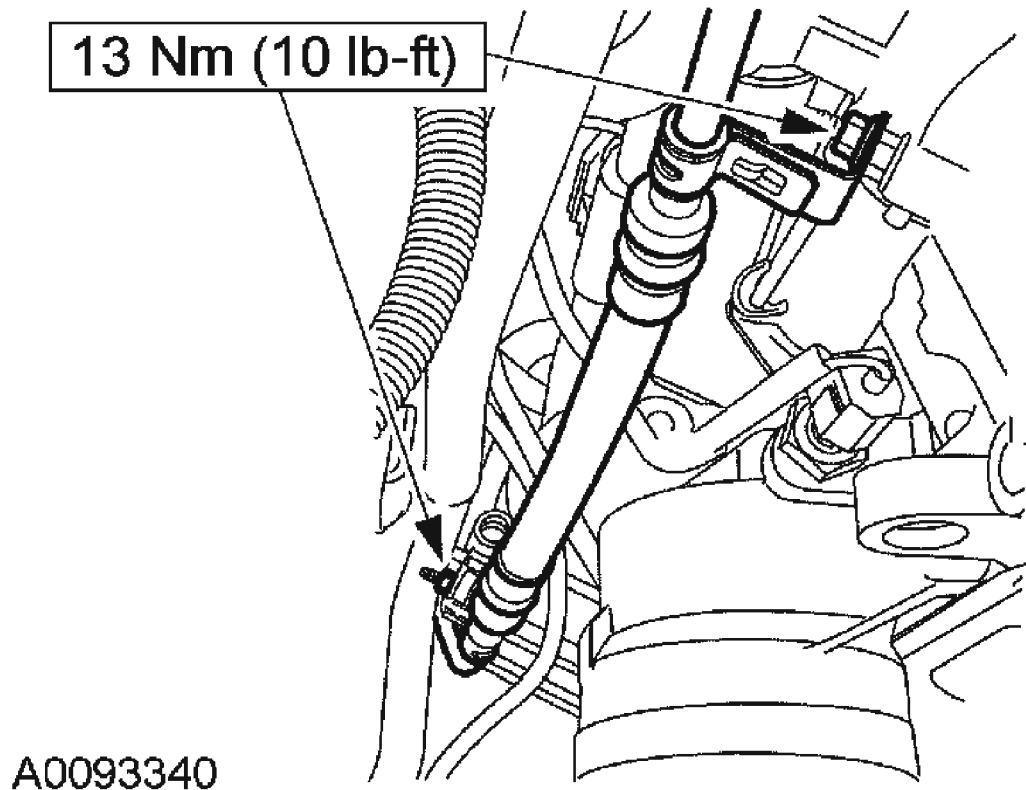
Removing Bolts And Position Aside Power Steering Line
